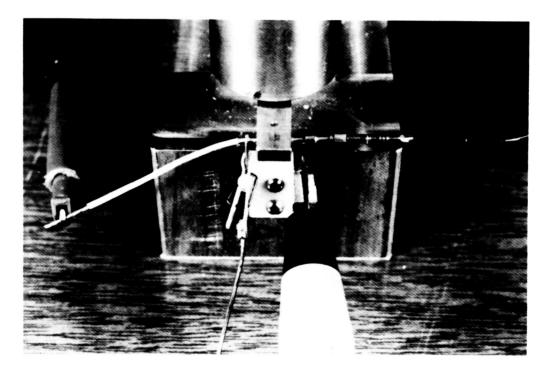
Solder joint (stranded conductor to connector cup) in test fixture for electrical resistance measurement (R105344).
